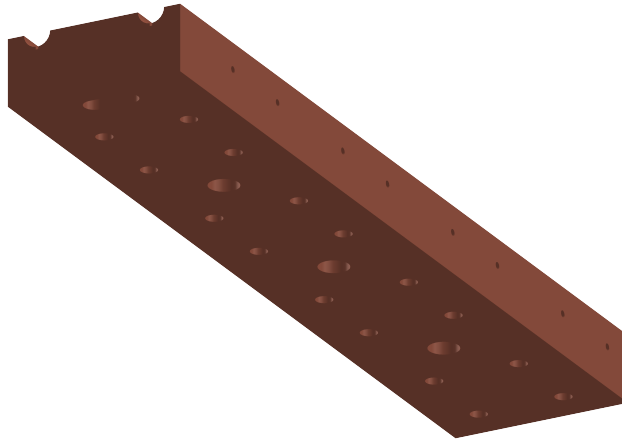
Tilted view of the bottom of the shortest copper block showing the quadratically arranged threaded holes on the bottom.
